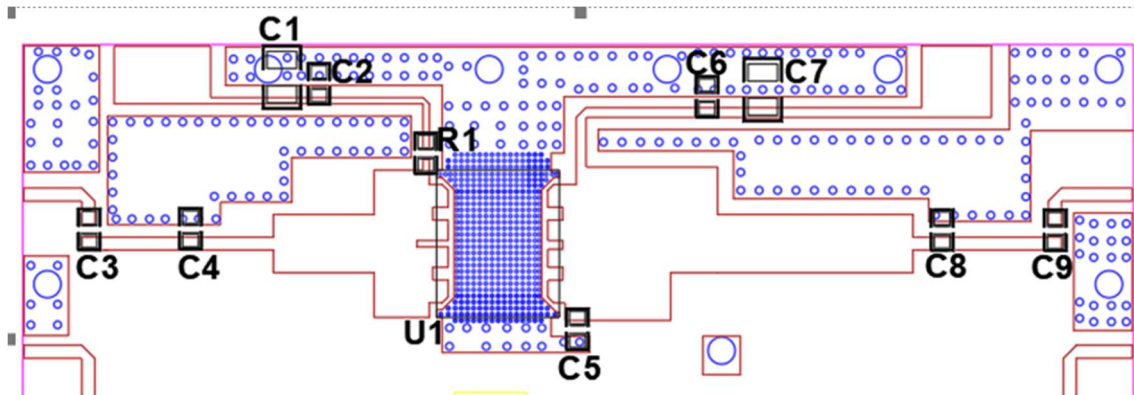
Test Circuit Component Layout, 20mils RO4350B
